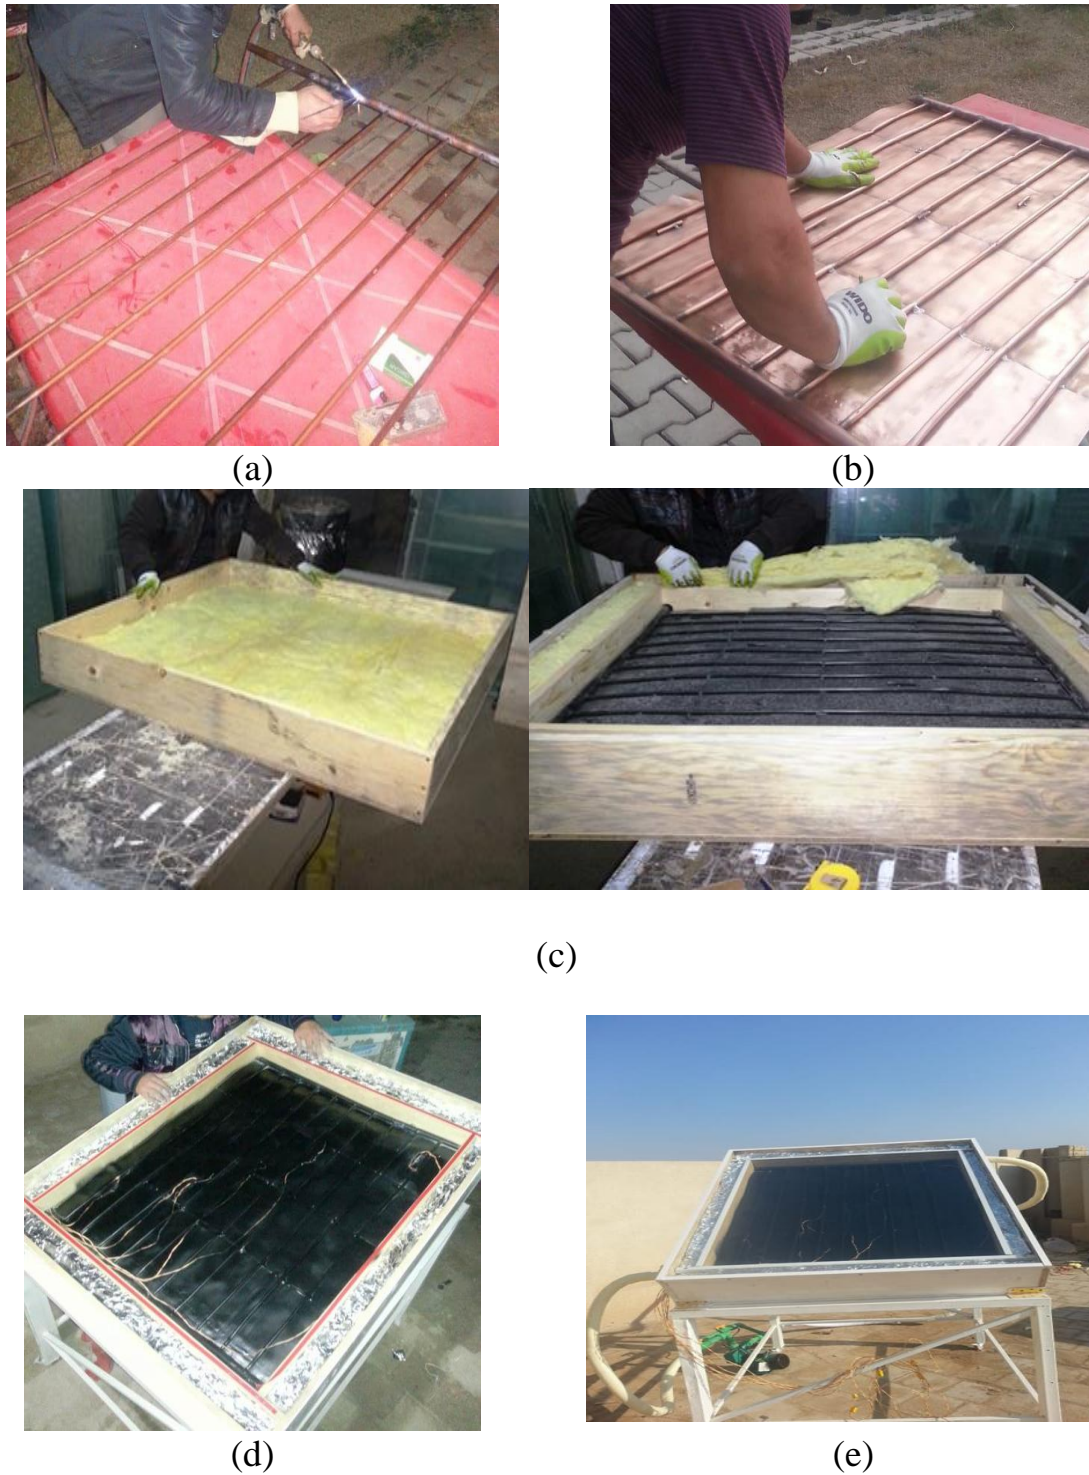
Manufacturing the solar collector, (a) the risers and headers are welded to form a pipe grid, (b) the copper pipe grid formed is welded on the absorption plate, (c) insulation with a glass wool from the bottom and sides, (d) two layers of glass to cover the solar collector, (e) the solar collector is mounted on an iron frame.
